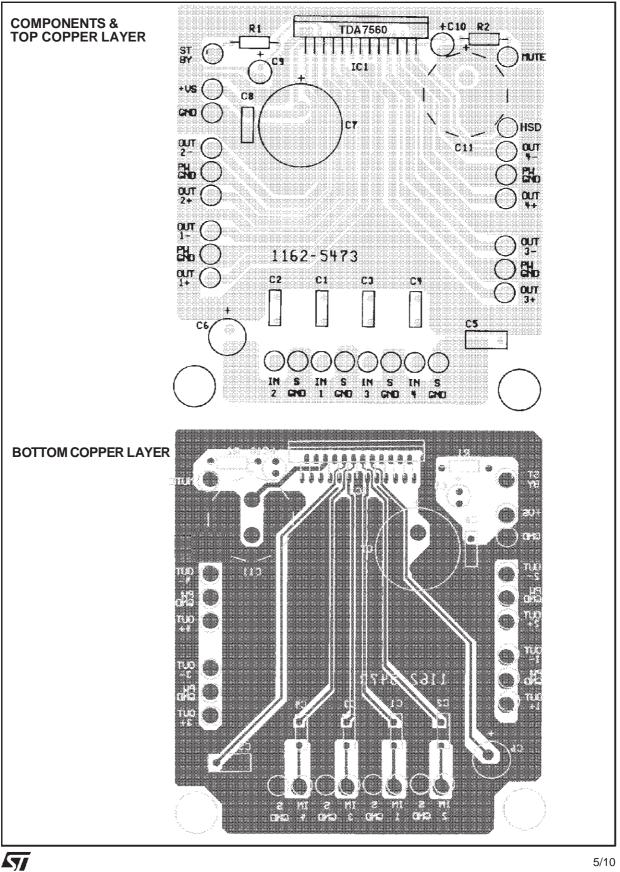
P.C.B. and component layout of the figure 1 (1:1 scale)
